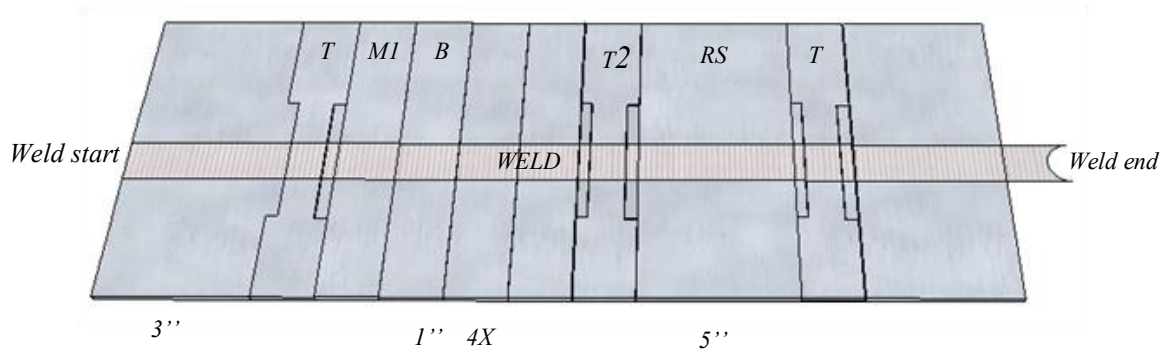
Schematic of self-reacting friction stir welded plates. Welded plates were cross-section perpendicular to the welding direction to prepare tensile and metallographic test specimens.
